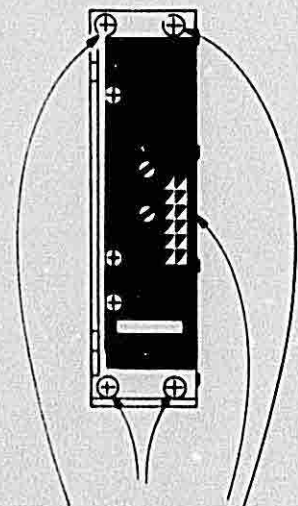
SOLDERLESS TERMINALS AND TOOLS
